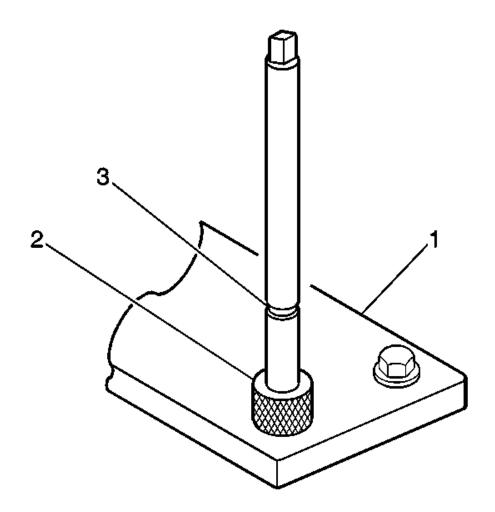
Installing Fixture Plate, Bolt, & Bushing Onto Engine Block Courtesy of GENERAL MOTORS CORP.
